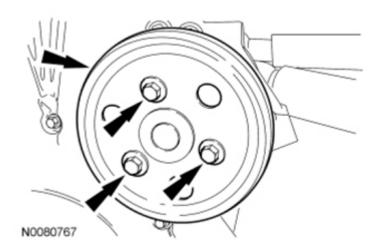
Locating Bolts And Coolant Pump Pulley Courtesy of FORD MOTOR CO.
